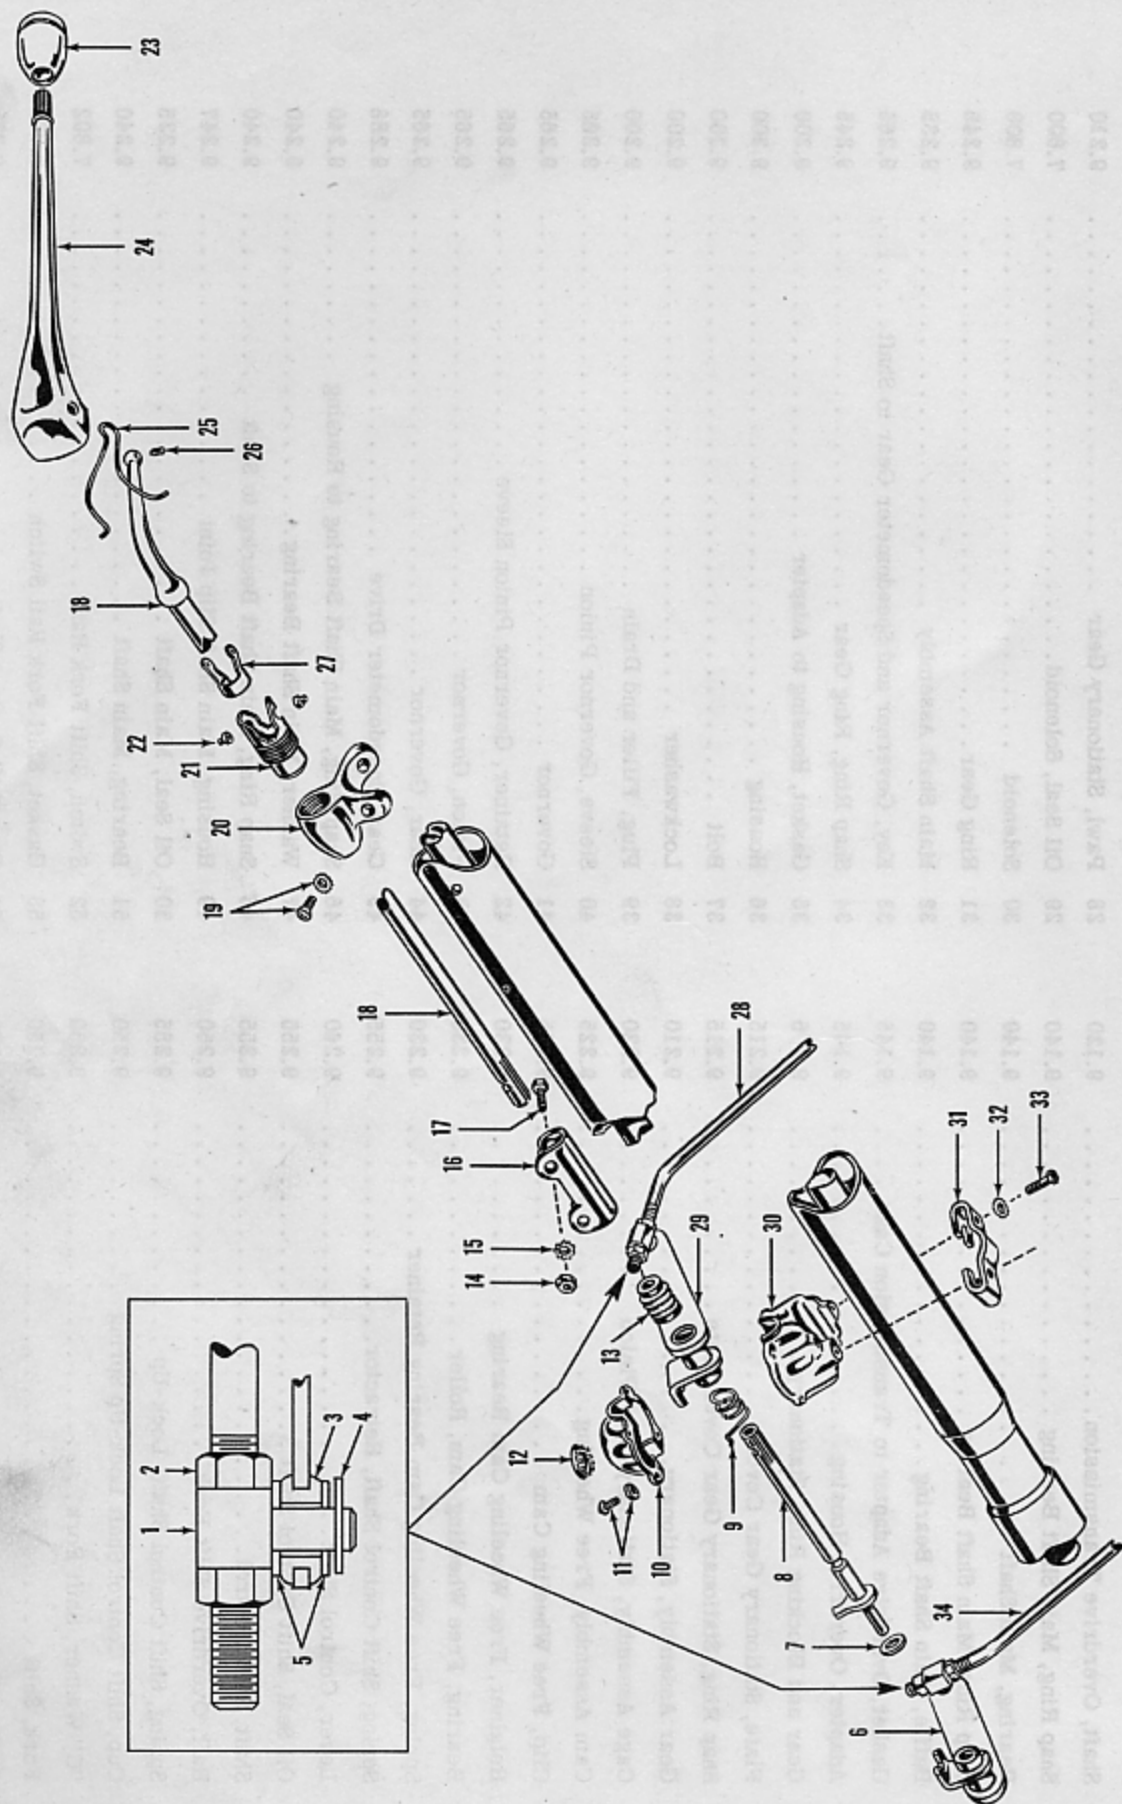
CONVENTIONAL TRANSMISSION GEAR SHIFT CONTROL - EXPLODED VIEW
